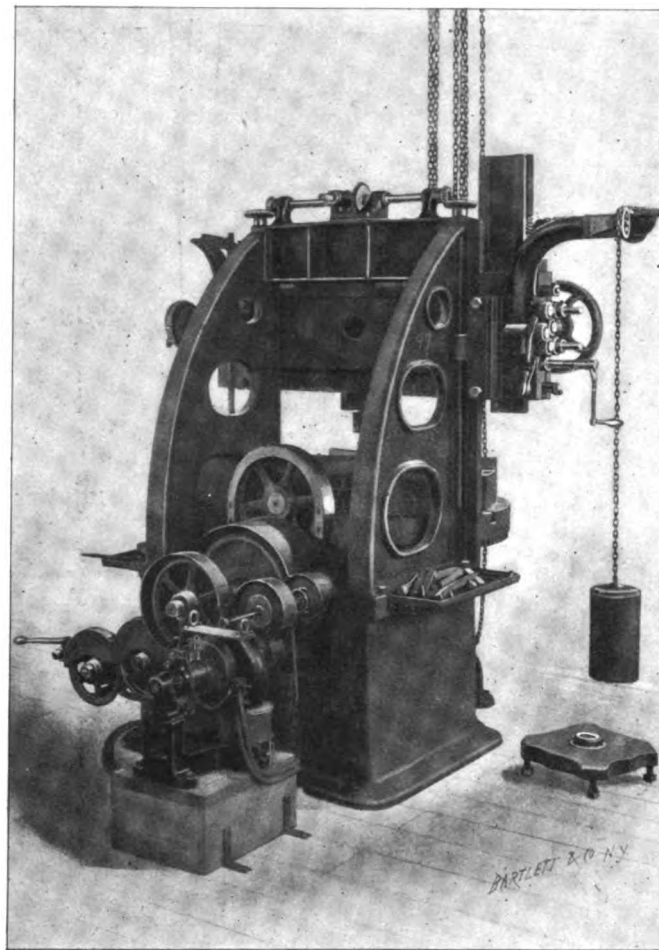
VERTICAL BORING MILL, DIRECT GEARED.
